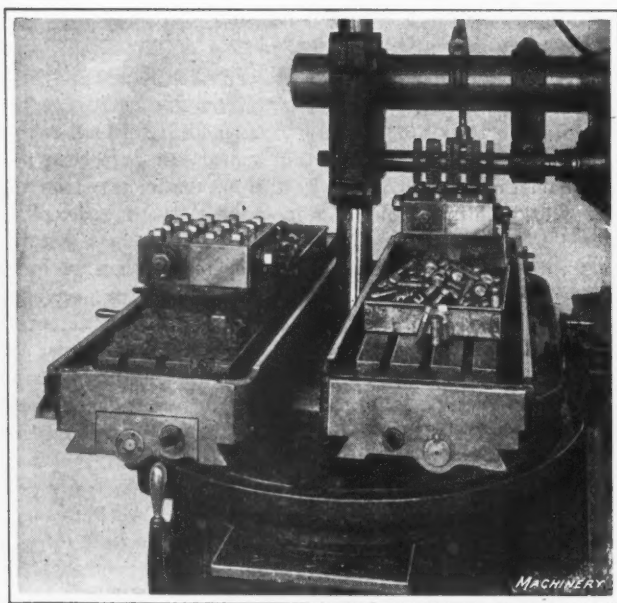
Indexing Rotary Milling Machine equipped for squaring Heads of Cap-screws
